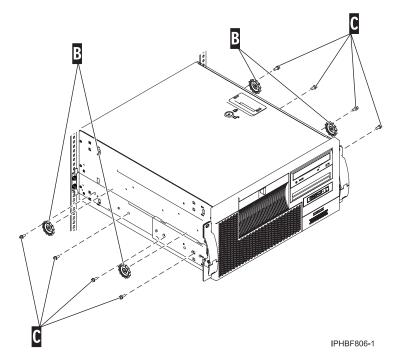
Securing the system to the rails and removing the rack-support wheels.
